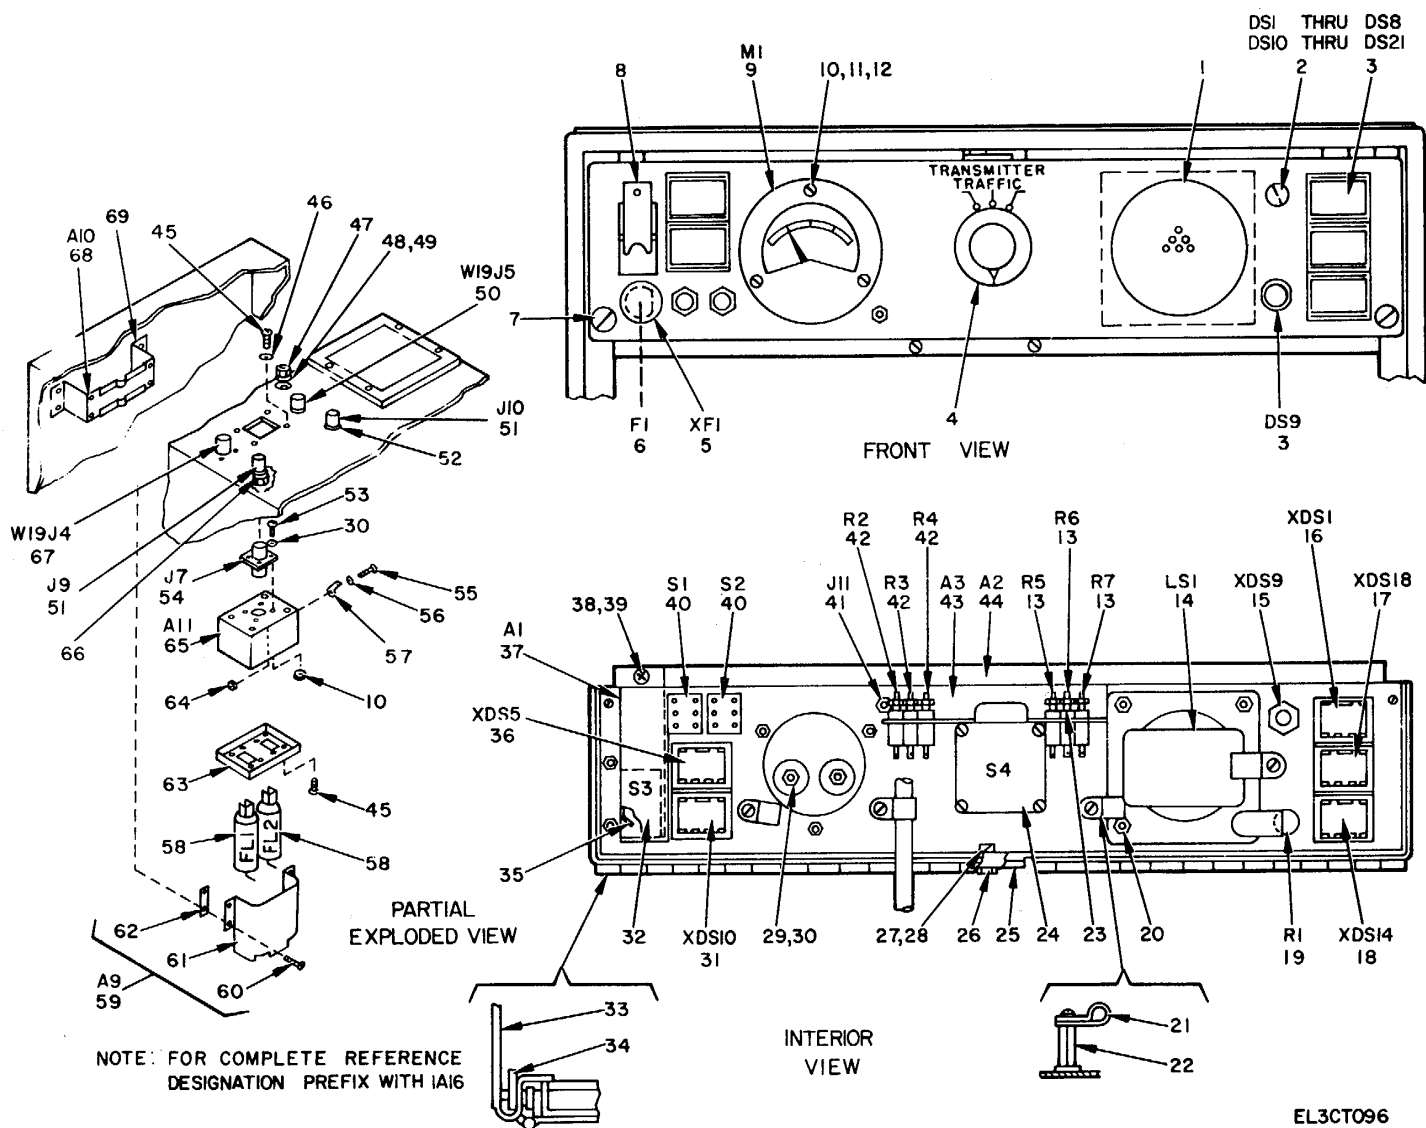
Cabinet, Electrical Equipment 1A16 (Sheet 1 of 3).
